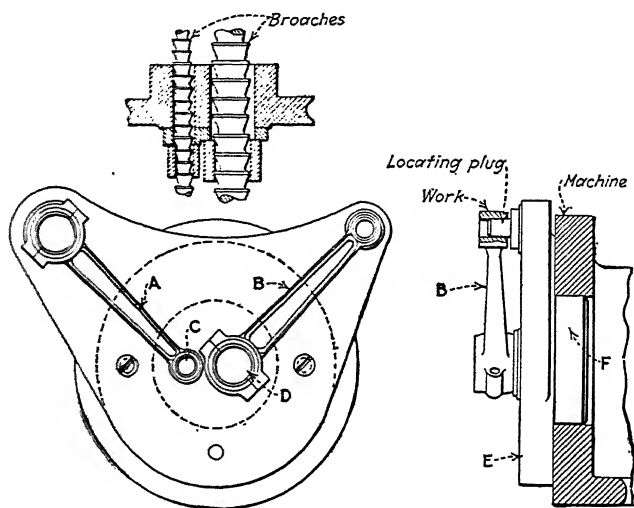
Double Broaching Fixture for Two Different Size Holes
